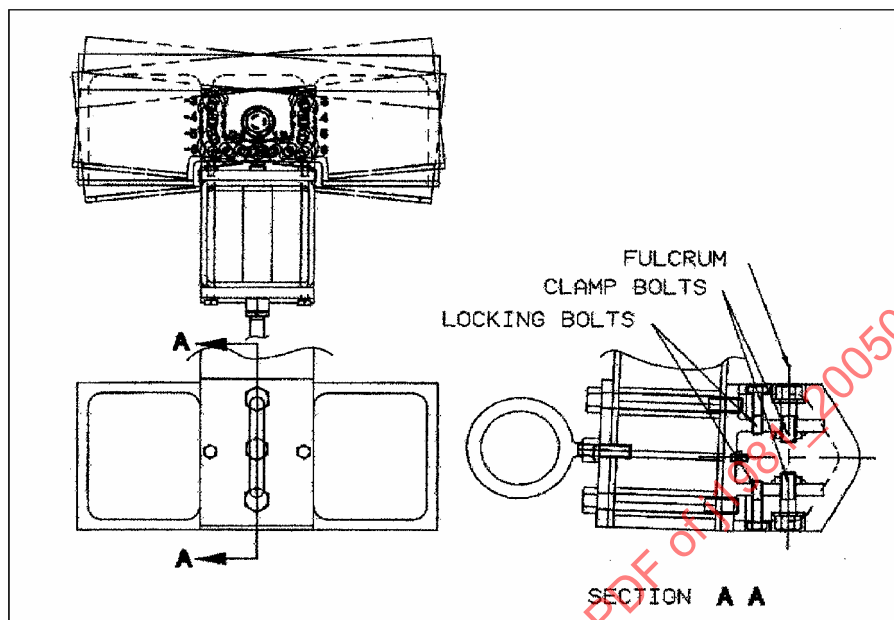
SAE J1981 STRIKER ASSEMBLY
